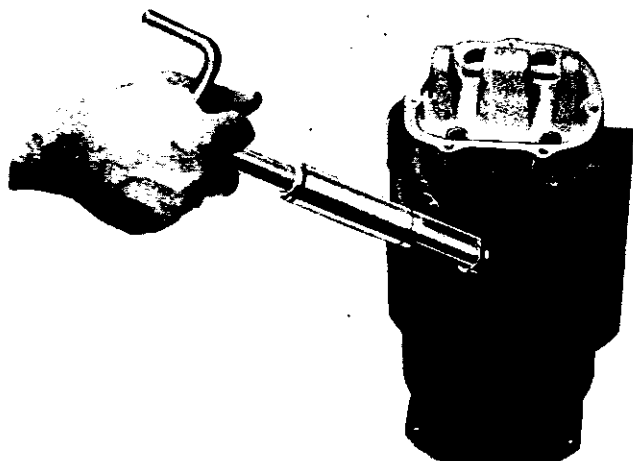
Installing Spark Plug Hole Heli-Coil Insert
